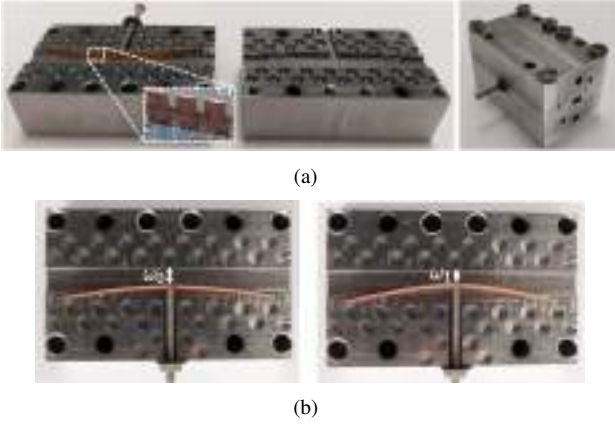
Manufactured prototype: (a) forming layers and assembled prototype, (b) detail of the modification of the curvature radius by the pressing screw.
